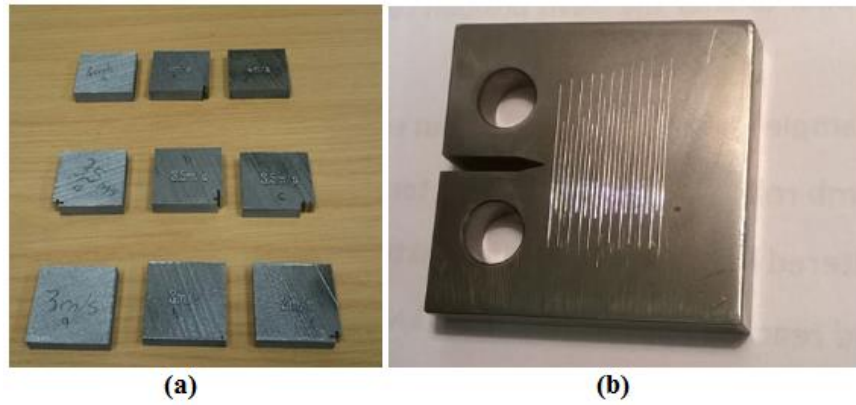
The SLM Ti6Al4V FCGR samples: (a) as build; (b) After machining
